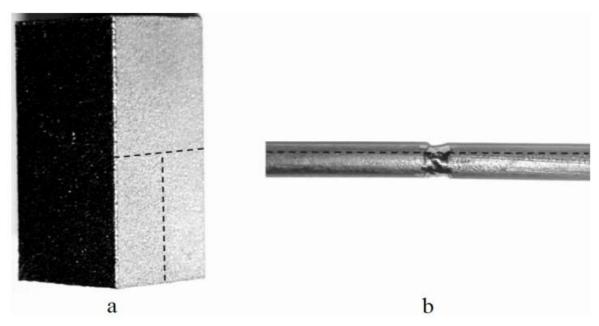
a) cuboid obtained in SLM; b) wires welded by LSW. The dottes lines show the performed sections.
